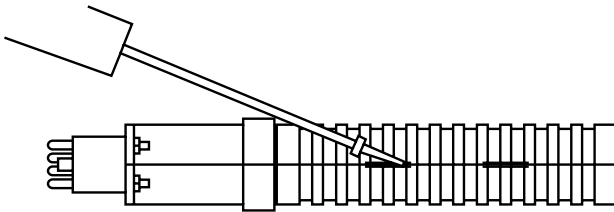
Using the screwdriver to pry open the MT166A's case.
